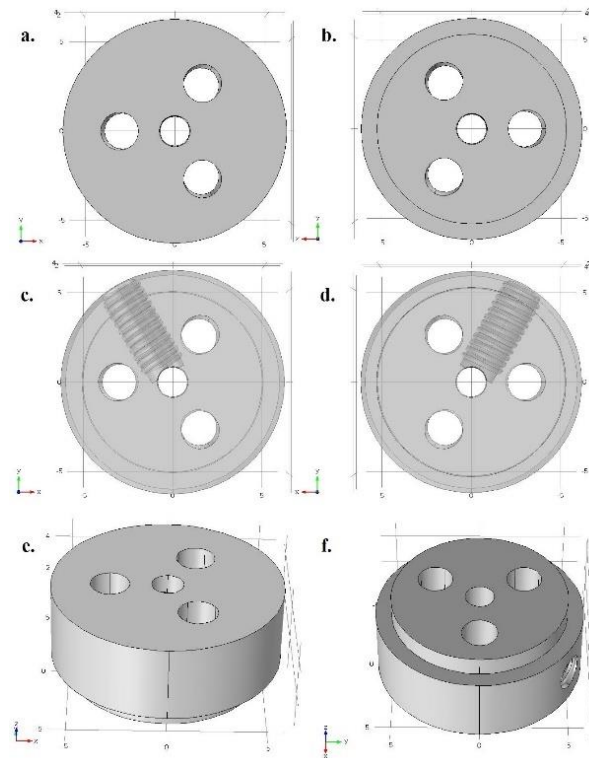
Schematic illustrations of top and bottom view of upper part of prototype 8, (a. top solid view, b. bottom solid view, c. top transparent view, d. bottom transparent view, e. top inclined solid view, f. bottom inclined solid view)
